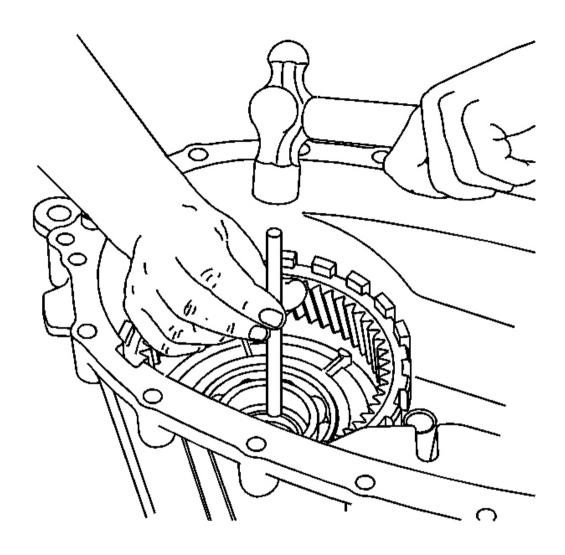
Removing Input Seal By Using Hammer & Punch Courtesy of GENERAL MOTORS CORP.
